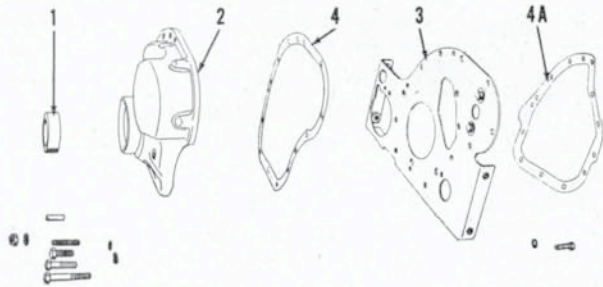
Diesel timing gear cover (2) an associated parts.
